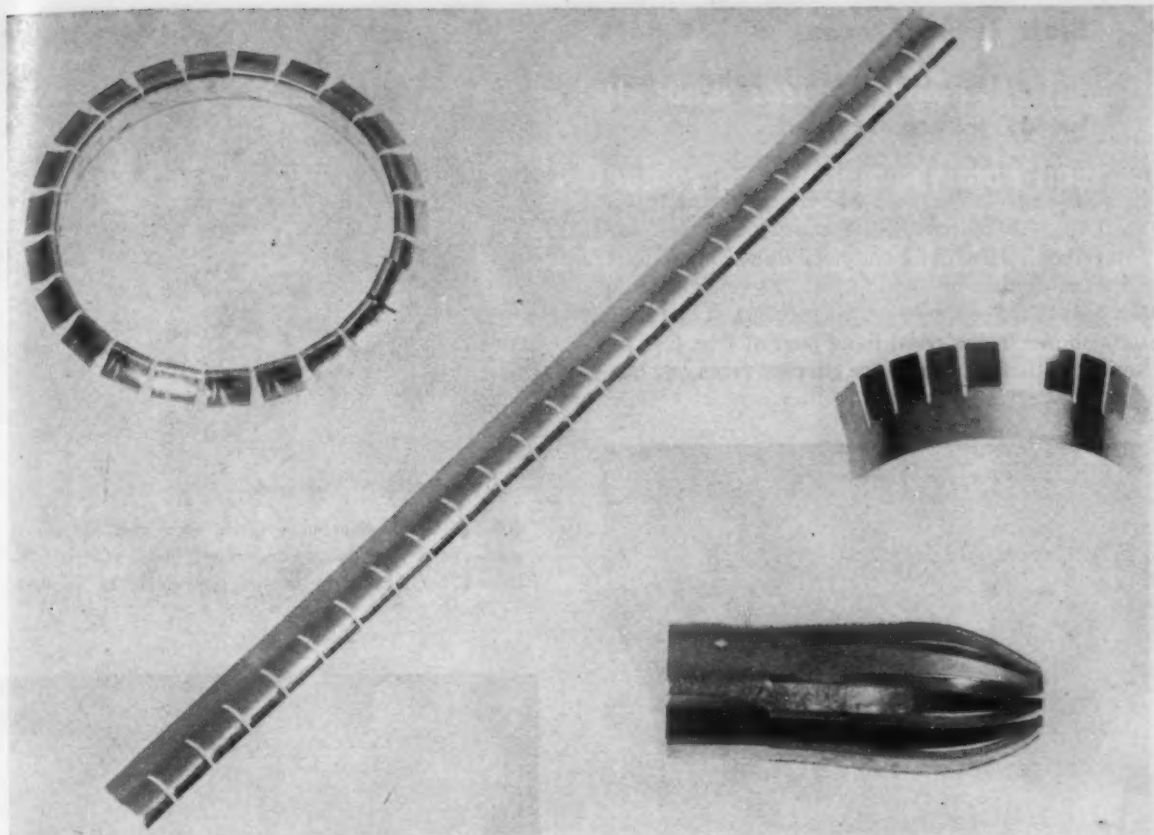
These four types of Berylco 25 parts are spot welded to 65-35 bronze. The parts serve as spring clamps
